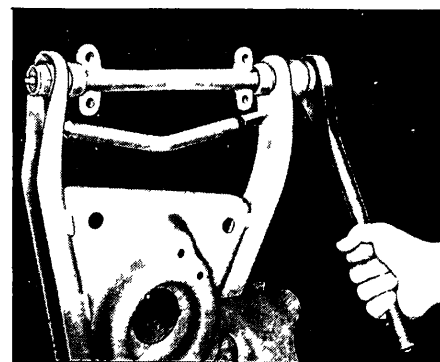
1950-52. Using spreader tool to keep lower control arm members aligned to prevent binding of threaded bushings
